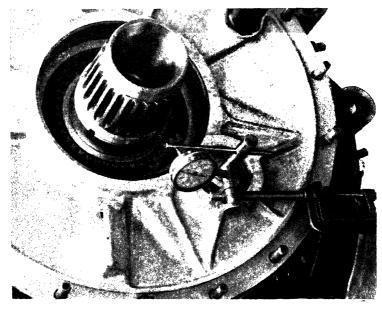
SIMULTANEOUS ASSEMBLY OF CRANKSHAFT SLEEVE AND CAM SLEEVE.
